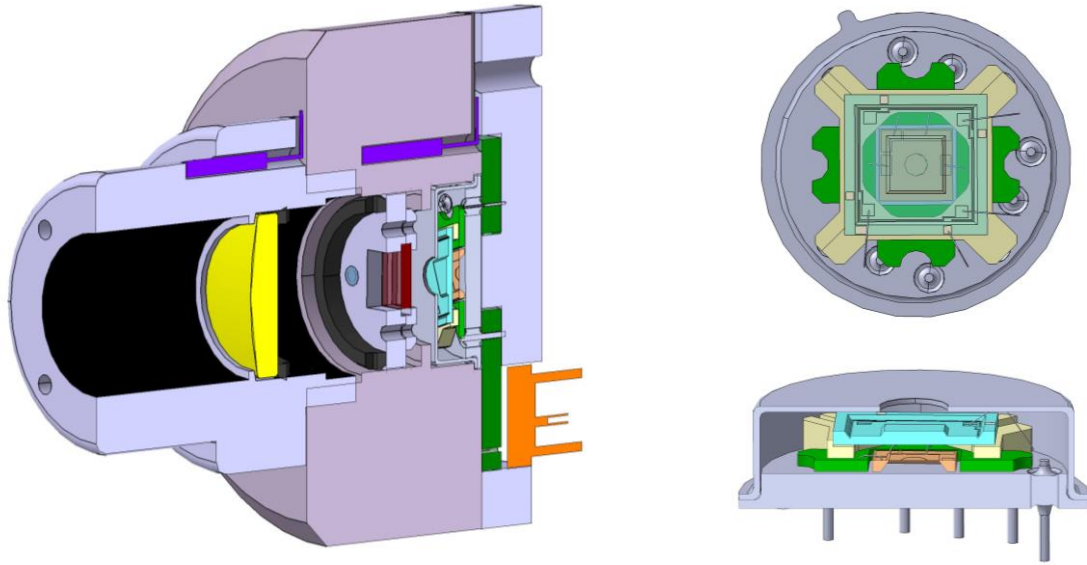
Left: Cut view of the spectrometer sensor head showing the baffle (black), lense (yellow), order blocking filter (red), FPI filter (cyan) and thermopile (orange). Top Right: Top view of the FPI Sensor and Filter Assembly. Bottom Right: Cut view of the Sensor including the Fabry-Perot filter (cyan) and thermopile sensor (orange).
